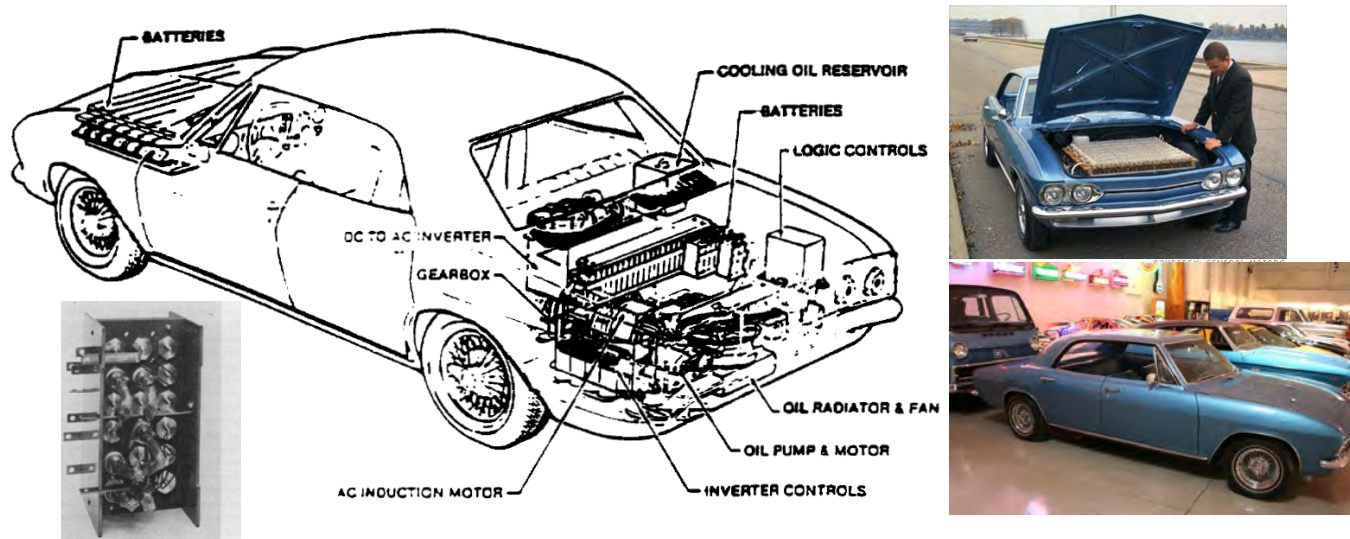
CUTAWAY VIEW OF GENERAL MOTORS ELECTROVAIR
